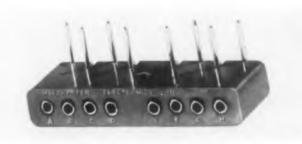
(above) Made by Amp. Inc., these component tips provide a way of attaching component parts to printed boards that have neither plated through nor eyelet connections.
